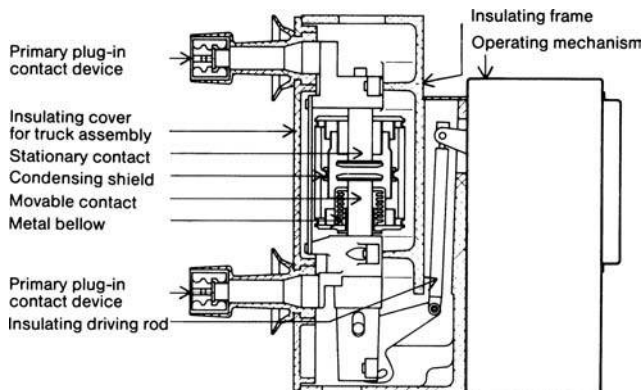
Outline and interrupter details of a 15-kV horizontal-drawout vacuum circuit breaker 2000A, 28 kA. (ABB T&D Company, Inc.)
